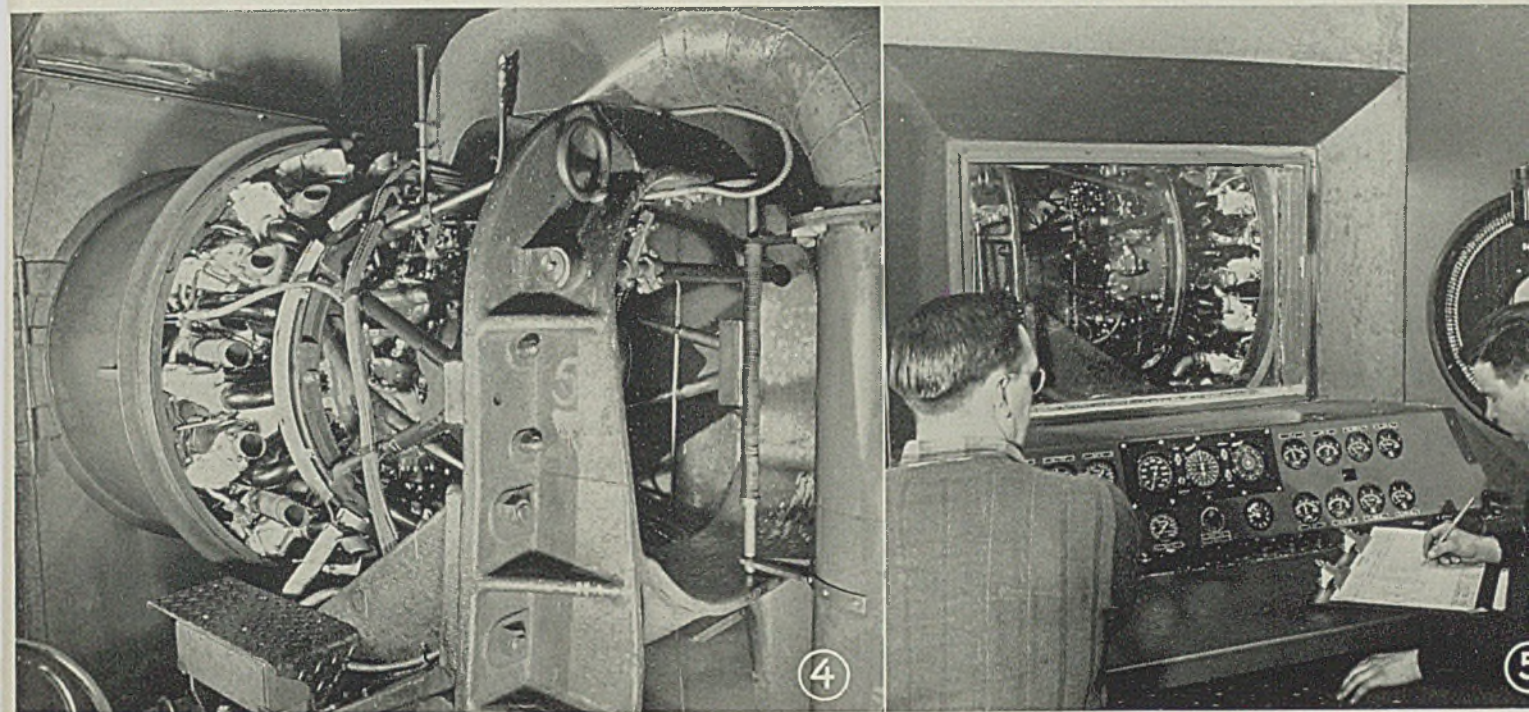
Mounted in test cell, engine is ready for initial test run. At a touch of the starter in the adjoining control room, it will roar into action
